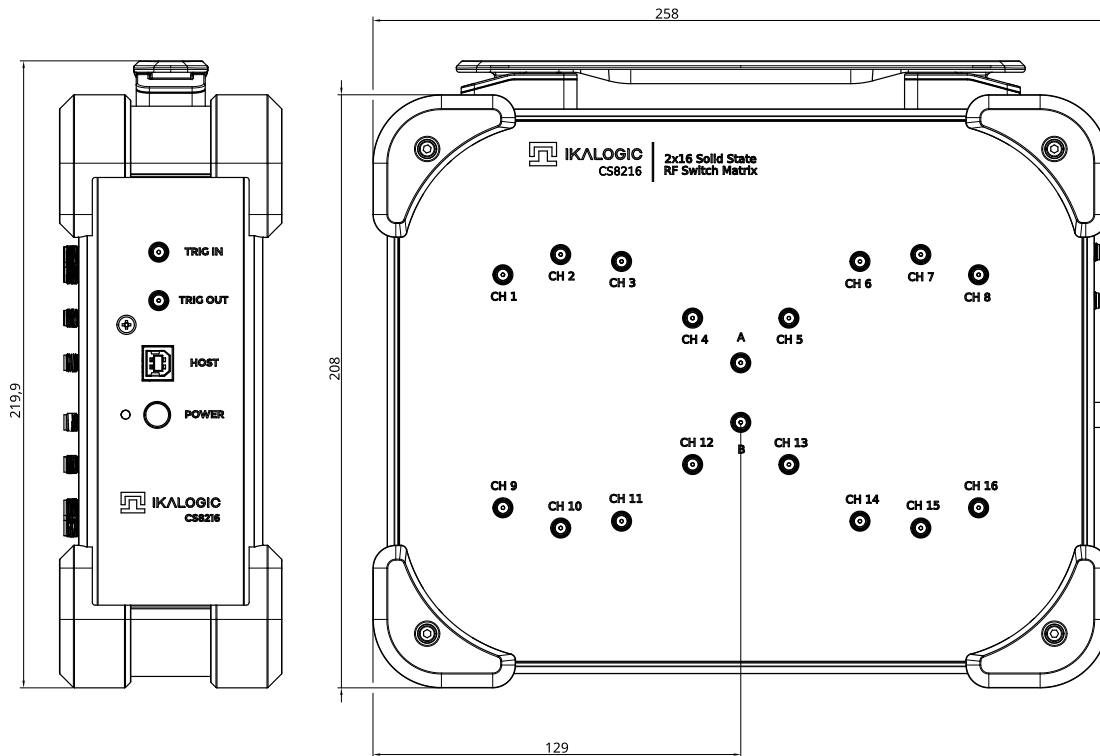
CS8216 Mechanical drawing - All dimensions in mm
